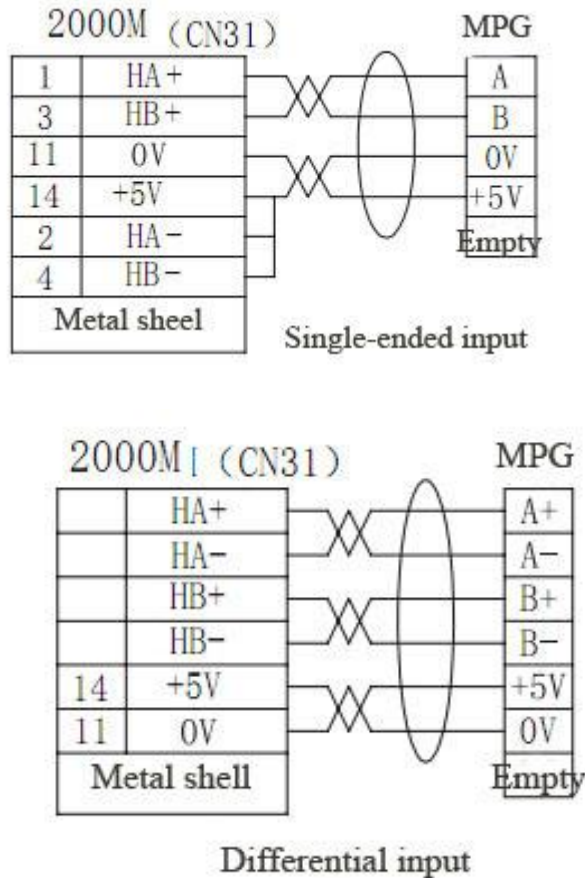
CN31 encoder port (26 cores DB type socket)
